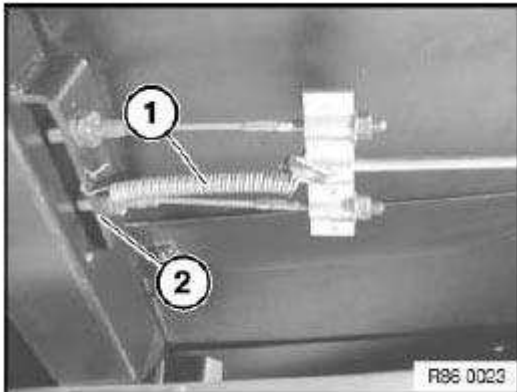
Identifying Tension Spring & Tension Spring Mount
